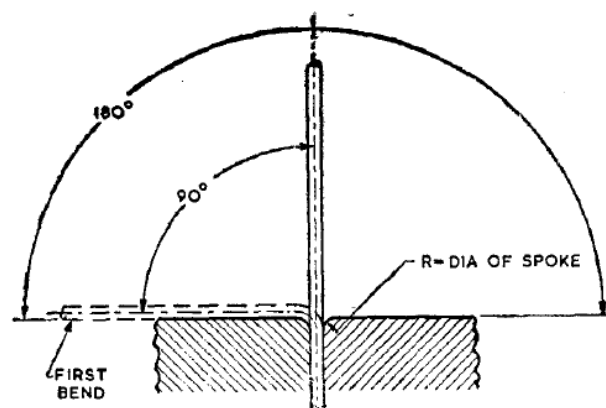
REVERSE BEND TEST FOR SPOKE WIRE
